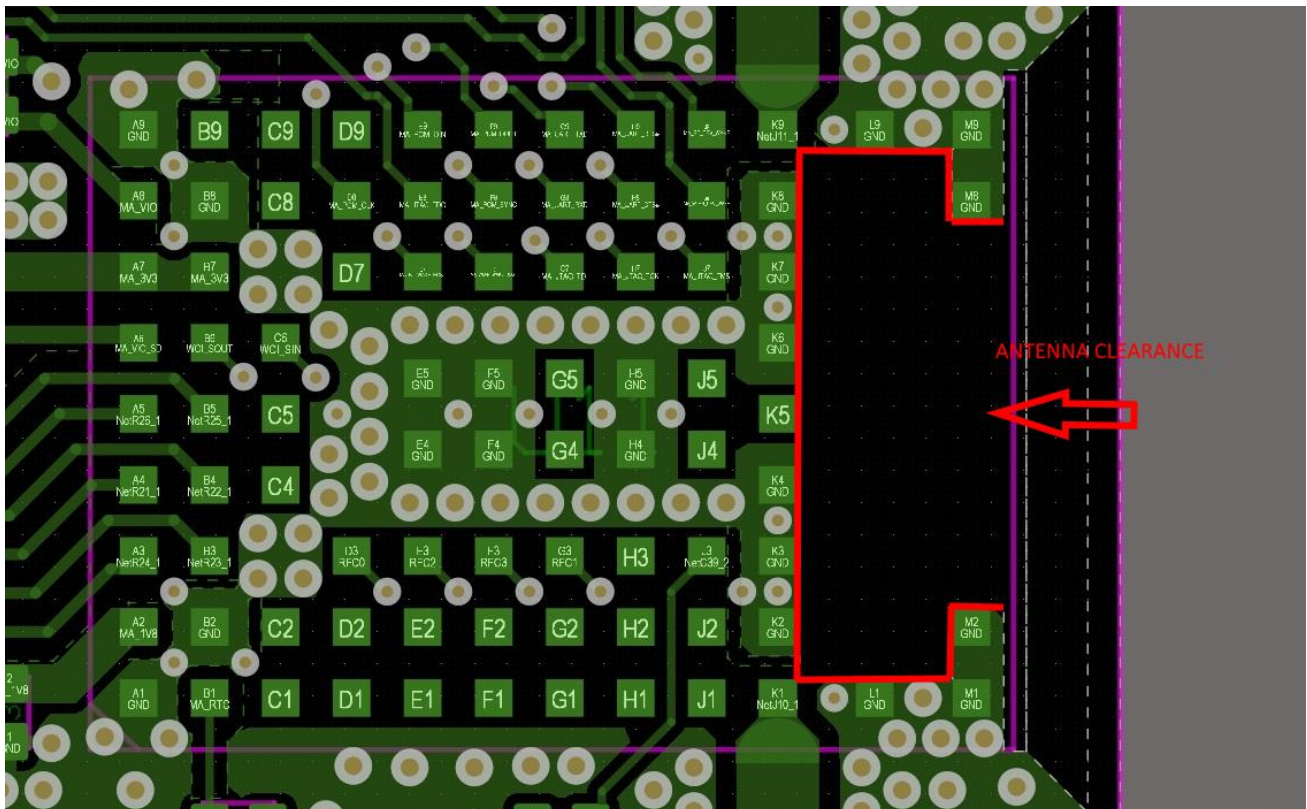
PCB artwork on main PCB top layer showing MAYA-W166-00B placement and GND clearance
